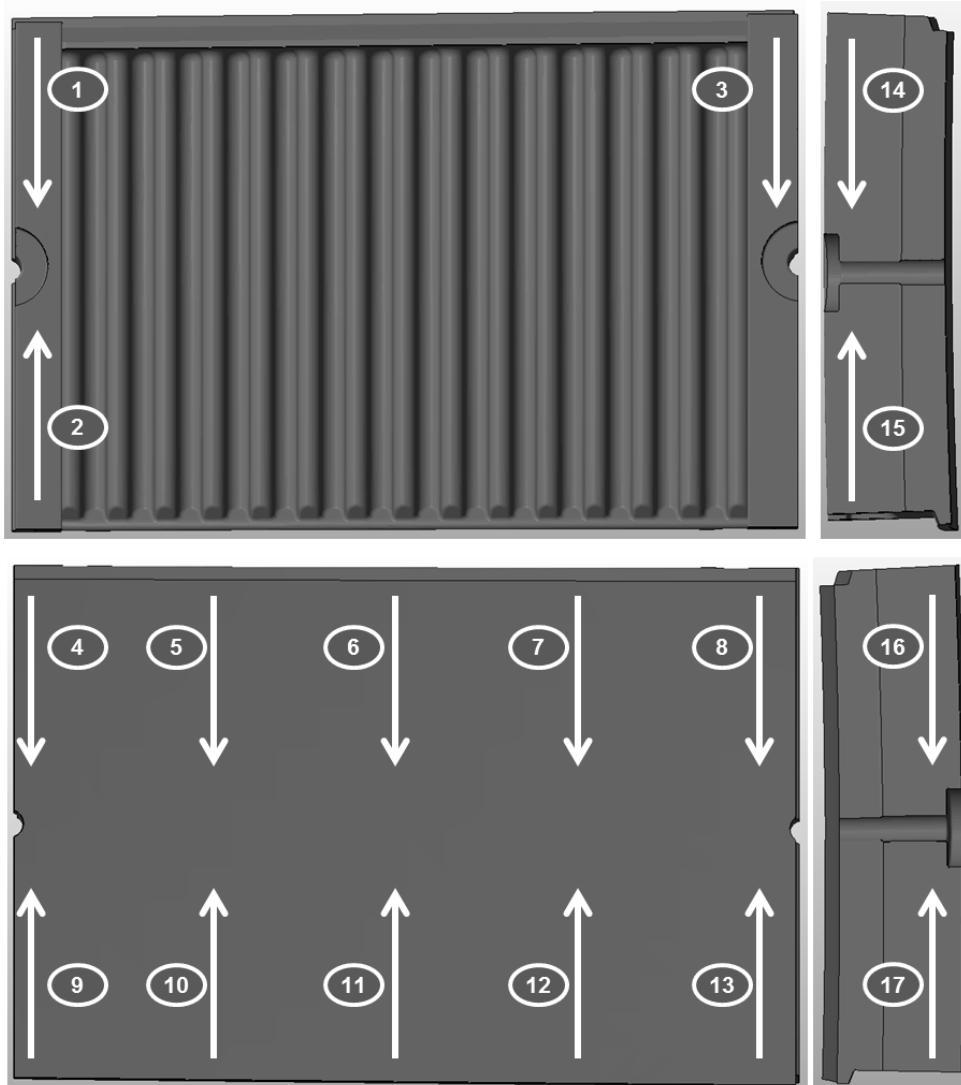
Results of dimensional measurement of GE Demonstrator #1;
